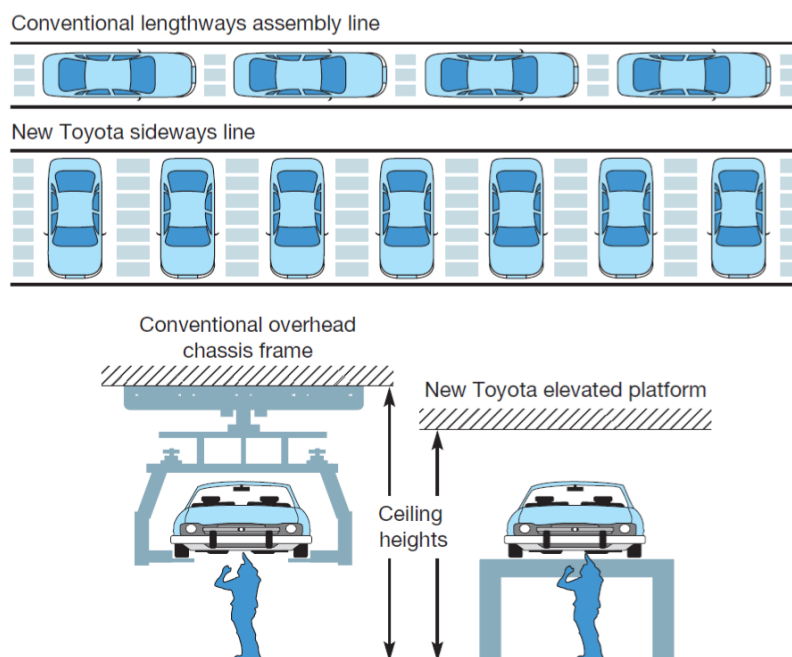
Contrasting arrangements in product (line) layout for automobile assembly plants
